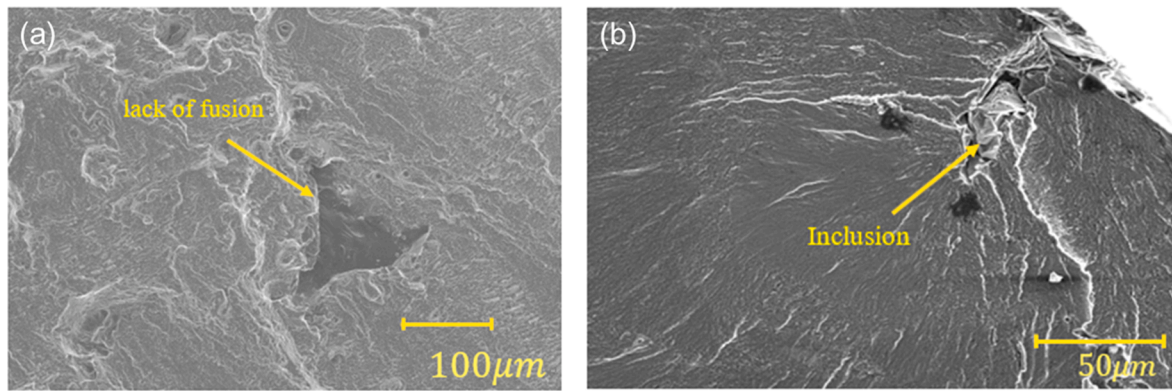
The defects in the present AlSi10Mg alloy examined by scanning electron microscope: (a) internal pore; (b) subsurface inclusion (the loading direction is perpendicular to the fracture surface).
